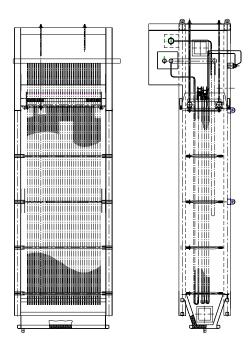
Vertical Tube/Horizontal Gas Flow Arrangement
